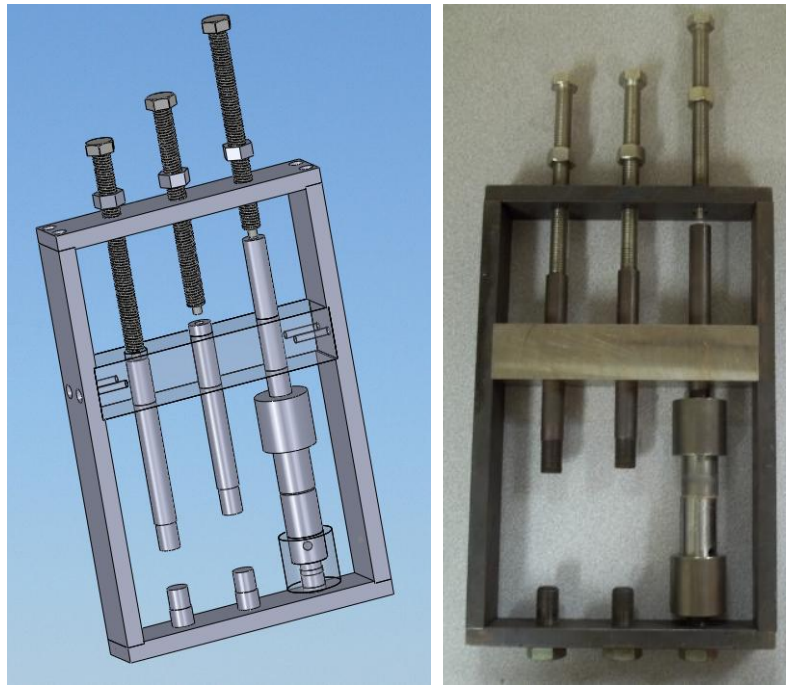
(a) 3D model of the gluing device and (b) machined and assembled device
